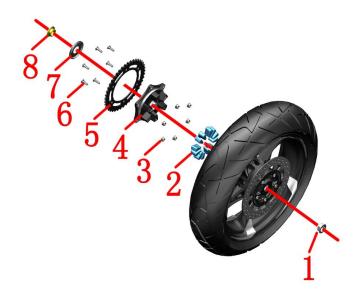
REAR WHELL		Rear wheel component 2	CHK	40)
